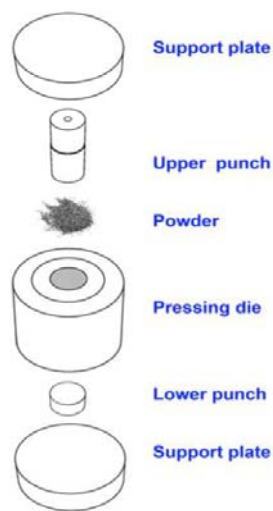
Uniaxial cold press with rigid hole die ³⁶
